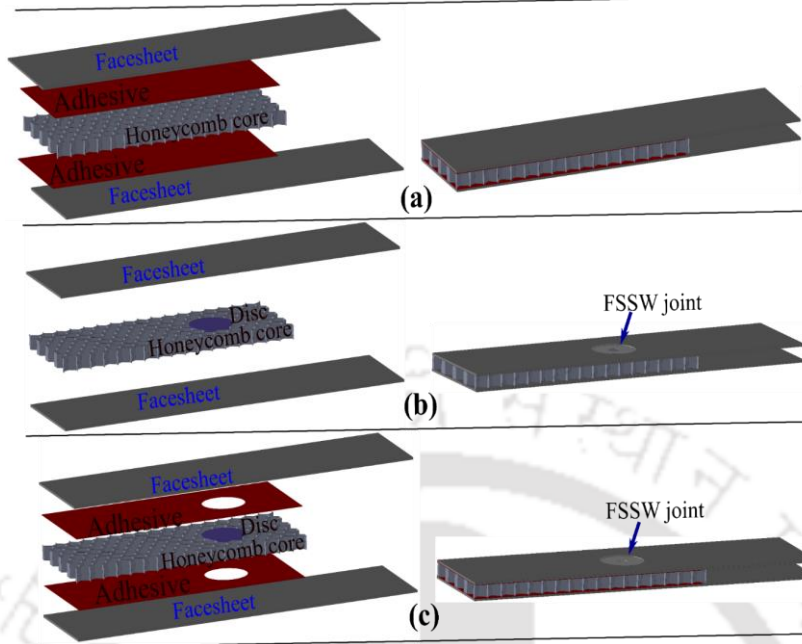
Fabrication of sandwich peel specimens by (a) AB (b) FSSW_D (c) FSSW_D_AB
